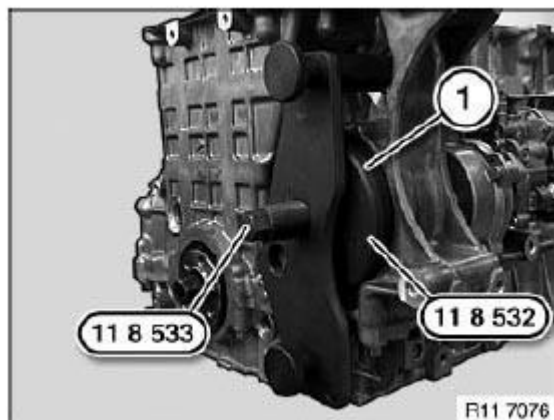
Identifying Sealing Cover With Special Tools 11 8 532 And 11 8 533
